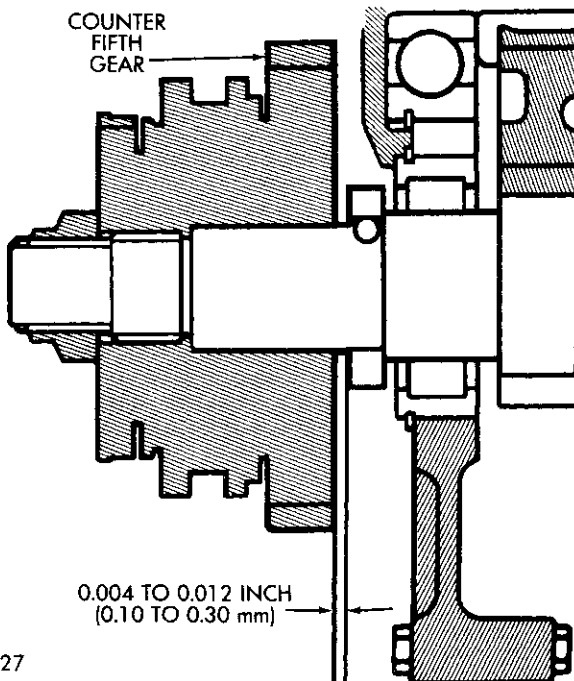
Measuring AX 5 Counter Fifth Gear Thrust Clearance
